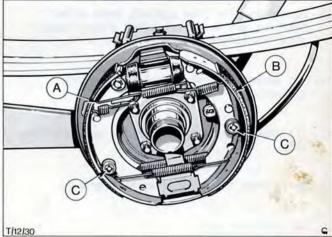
Rear brake shoe assembly. (LCX illustrated)
